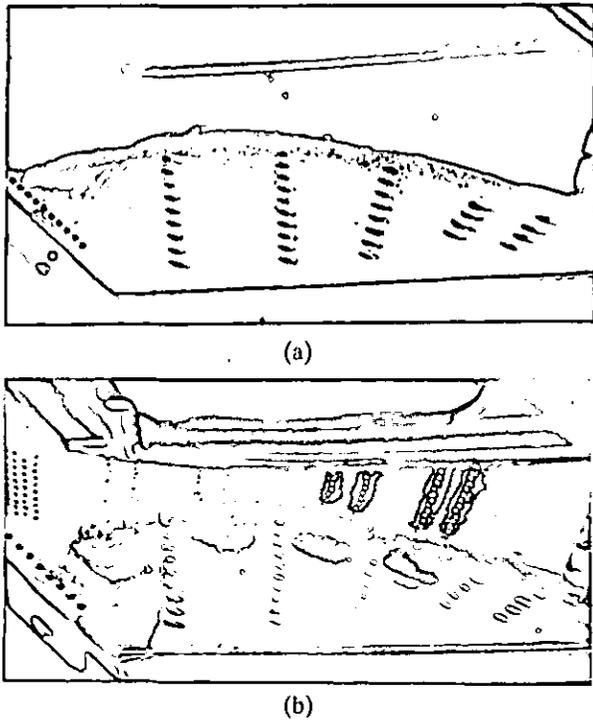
(a) A Thermal Barrier Coated JT9D Vane Platform After 2,778 Endurance Test Cycles. (b) A Metallic Coated Vane Platform from the Same Engine After 1,500 Endurance Test Cycles. The thermal barrier coating clearly reduces burning and thermal fatigue cracking.
